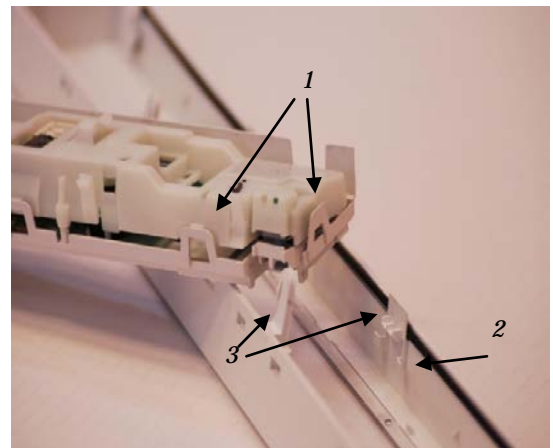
Two of ten snap-fits holding the inner pieces together ¹, one of eleven snap fits securing front panel to inner assembly², two of eight snaps fits securing the whole assembly to the main
